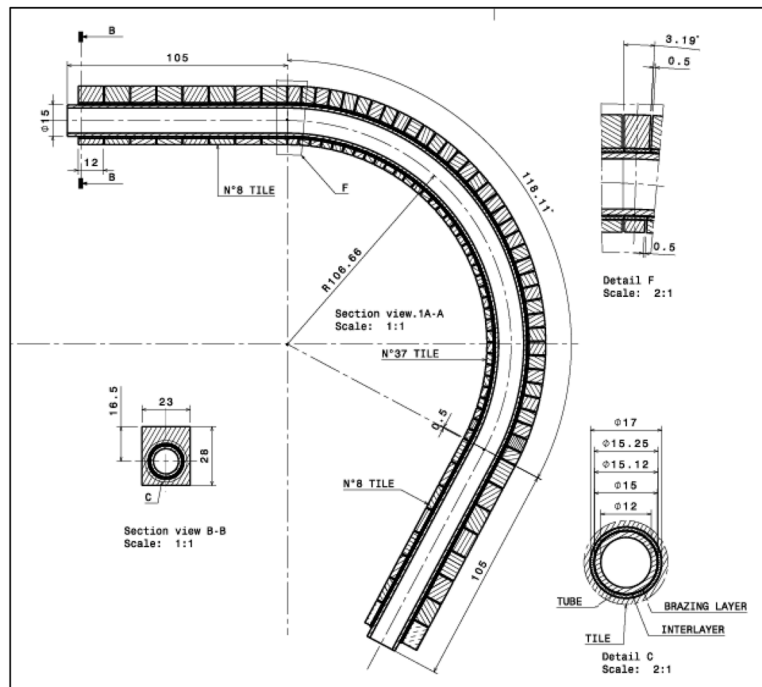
ENEA design of the OVT baffle for assembly and manufacturing.
